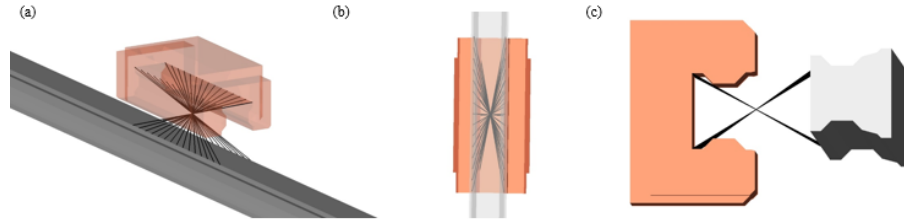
Transversal springs for roller elements (a) isometric-view (b) bottom-view (c) side-view
